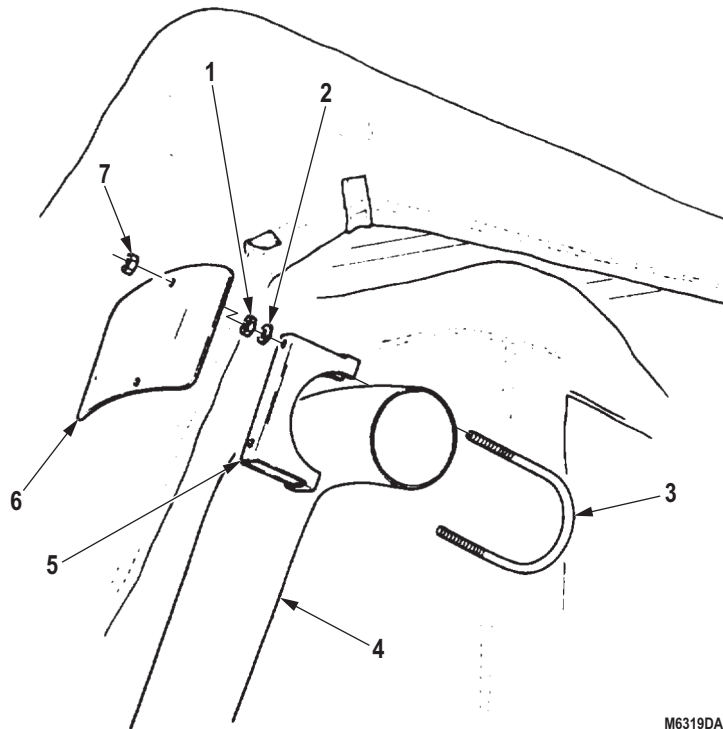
Exhaust Heat Shield Accessory Kit Removal.
